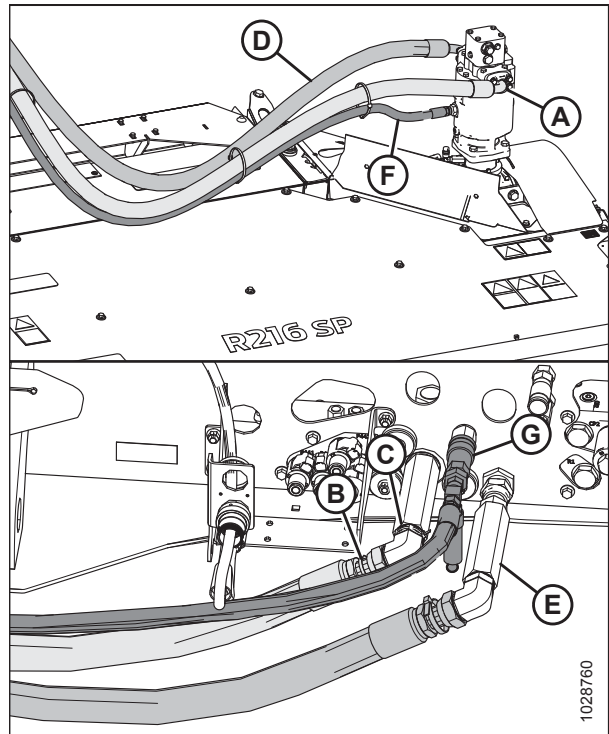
Hydraulic Connections on Disc Header and M1240 Windrower using Hard Plumb Fittings
